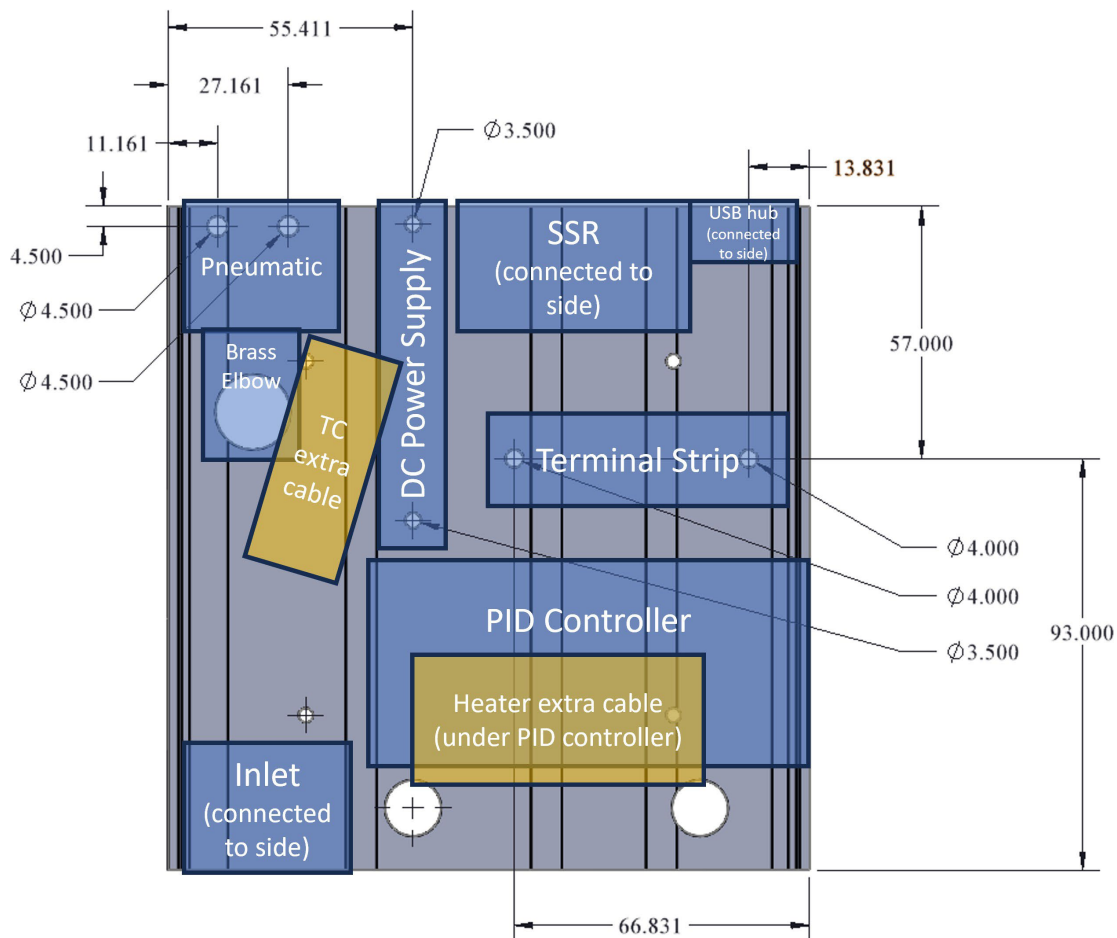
Mark II oven component layout. All measurements are in millimeters.
